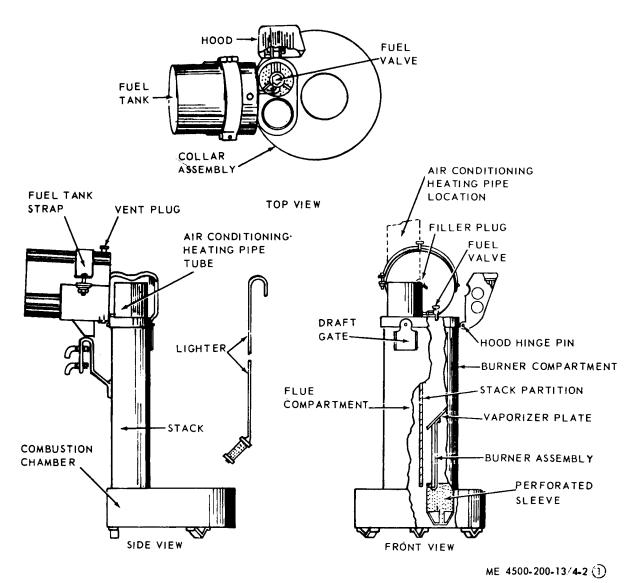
Immersion heater installation (FSN 4540-266-6835) (Model 447-2EX) (sheet 1 of 3).
